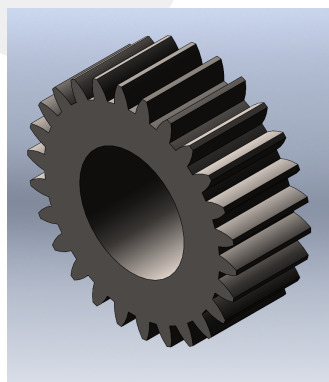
Isometric View of One of the Carrier Gears CAD Model.
